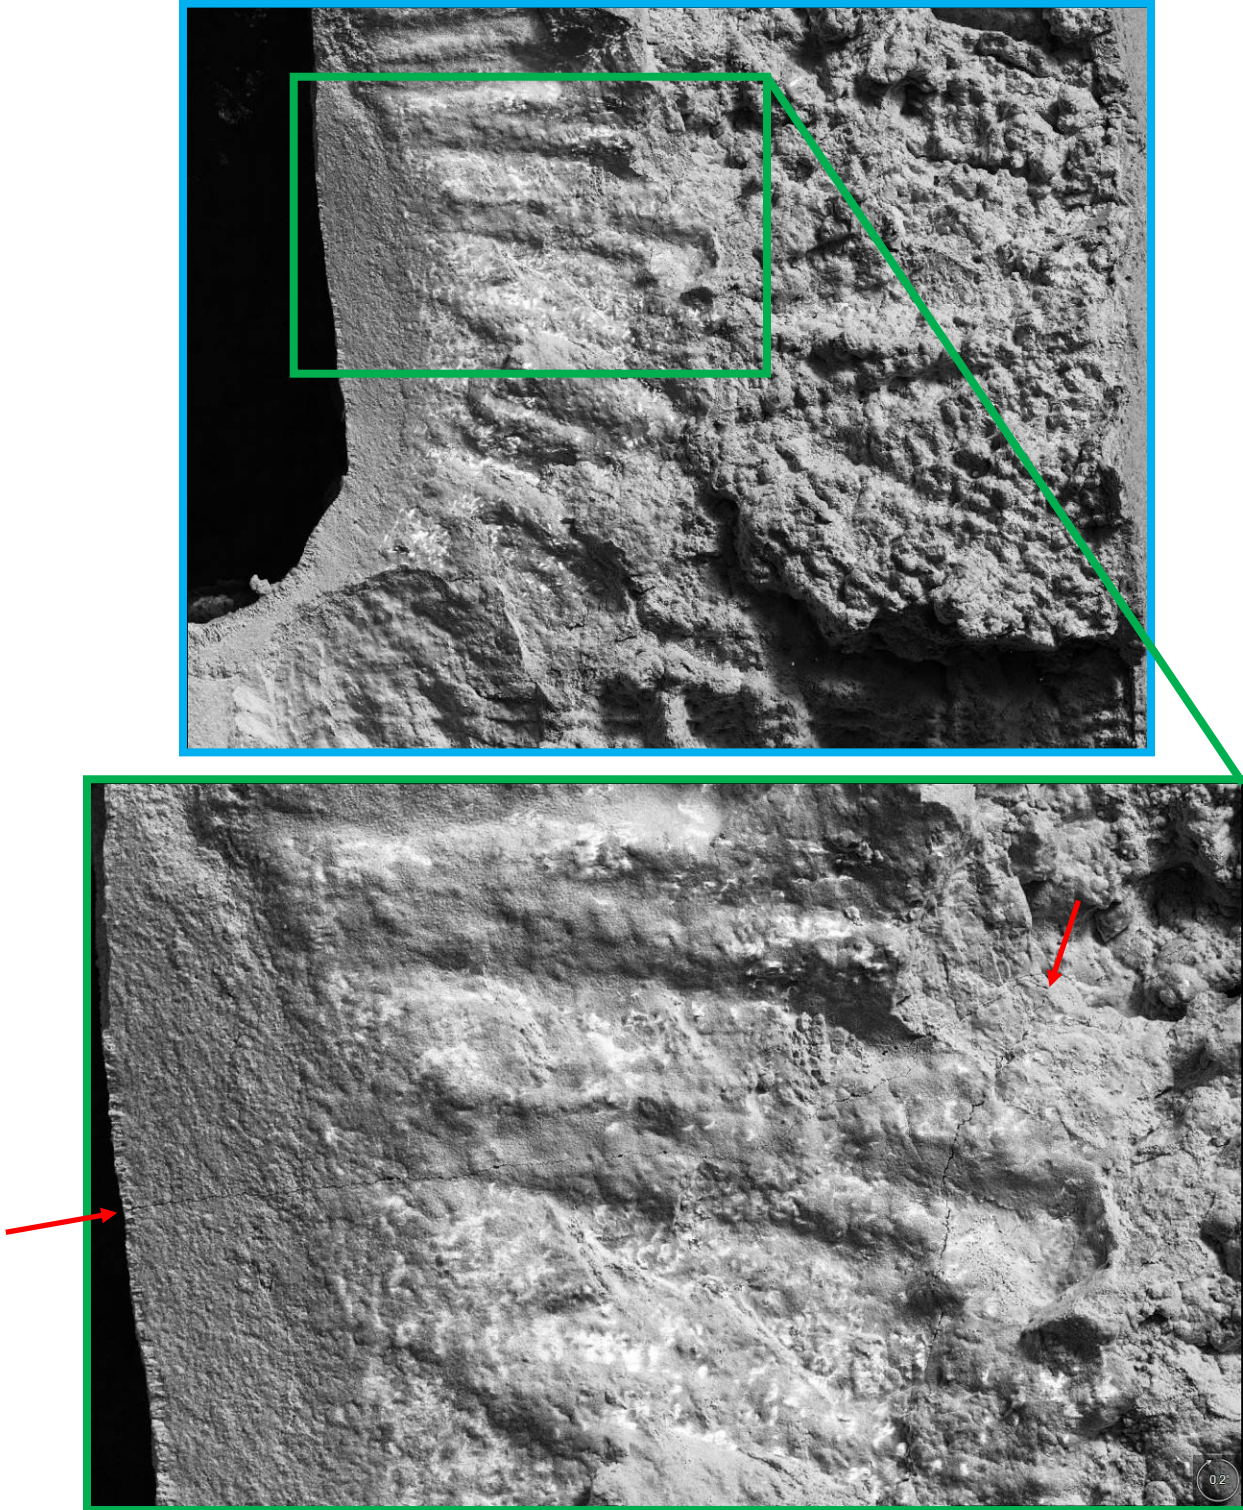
ETD BSE images of blade 1 fracture surface (refer to Fig. 6, blue rectangle). Upper image shows both smooth and intergranular fracture. The lower image shows the relatively flat texture at the hole, as well as two out of plane cracks (red arrows). No fatigue markers or river lines were apparent.
